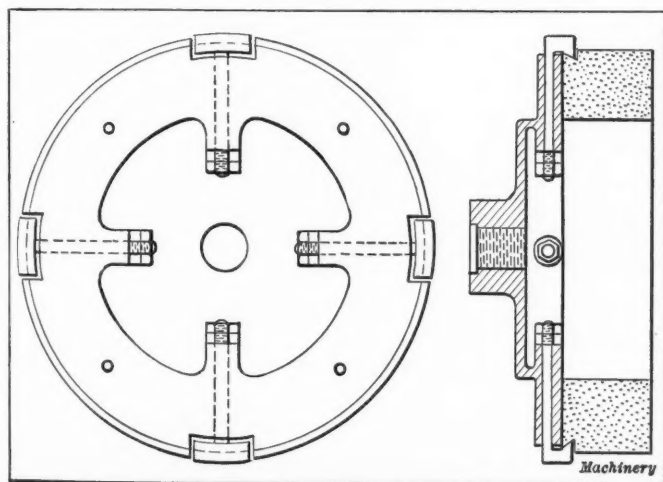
Faceplate and Chuck-jaws for Holding Grinding Wheel
